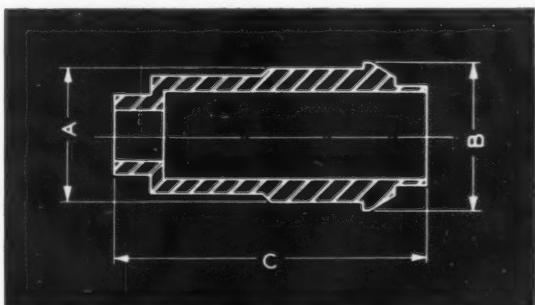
Elevating-screw drive sleeve made from hot-rolled AISI 4150 steel, round bar stock. Diameter (A) is 5 inches; (B), 5 5/8 inches; and length (C), 12 9/16 inches.
